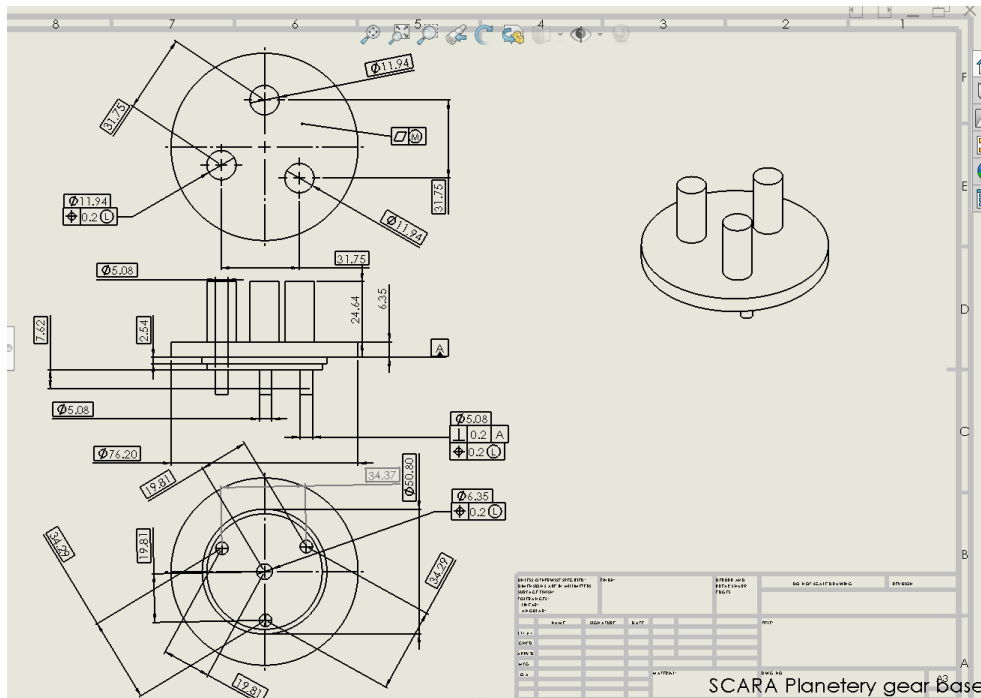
Engineering Drawing of SCARA Planetary Gear Base (millimeter precision)
